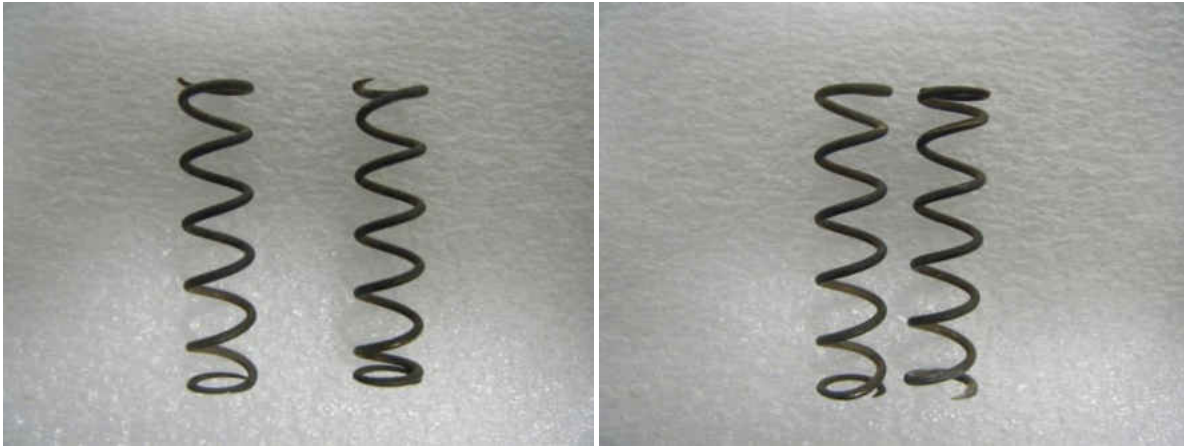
Spring geometry 3 after shape setting and final electrical discharge machining to increase contact
